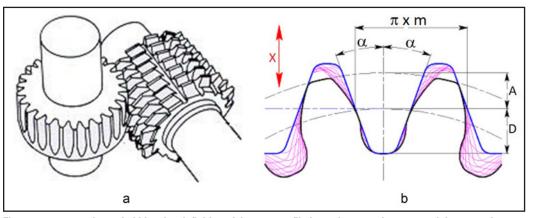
a – metal gear hobbing; b – definition of the gear profile by rack generation; m – module; α – rack profile (pressure) angle; A – gear tooth addendum; D – gear tooth dedendum; X – addendum modification or X-shift.
